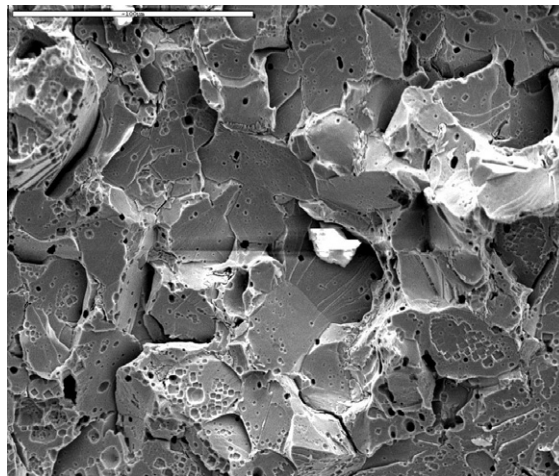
Magnification of fracture surface M65-04, cp. Fig. 7, intergranular fracture with etching pits. SEM, SE mode.
